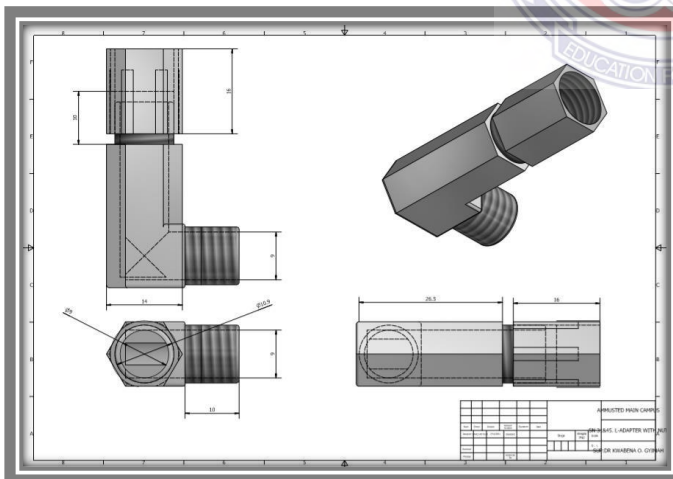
, SN 31&45: L-Adapter and Nut for Main, Movable Wheel Port and Motors
